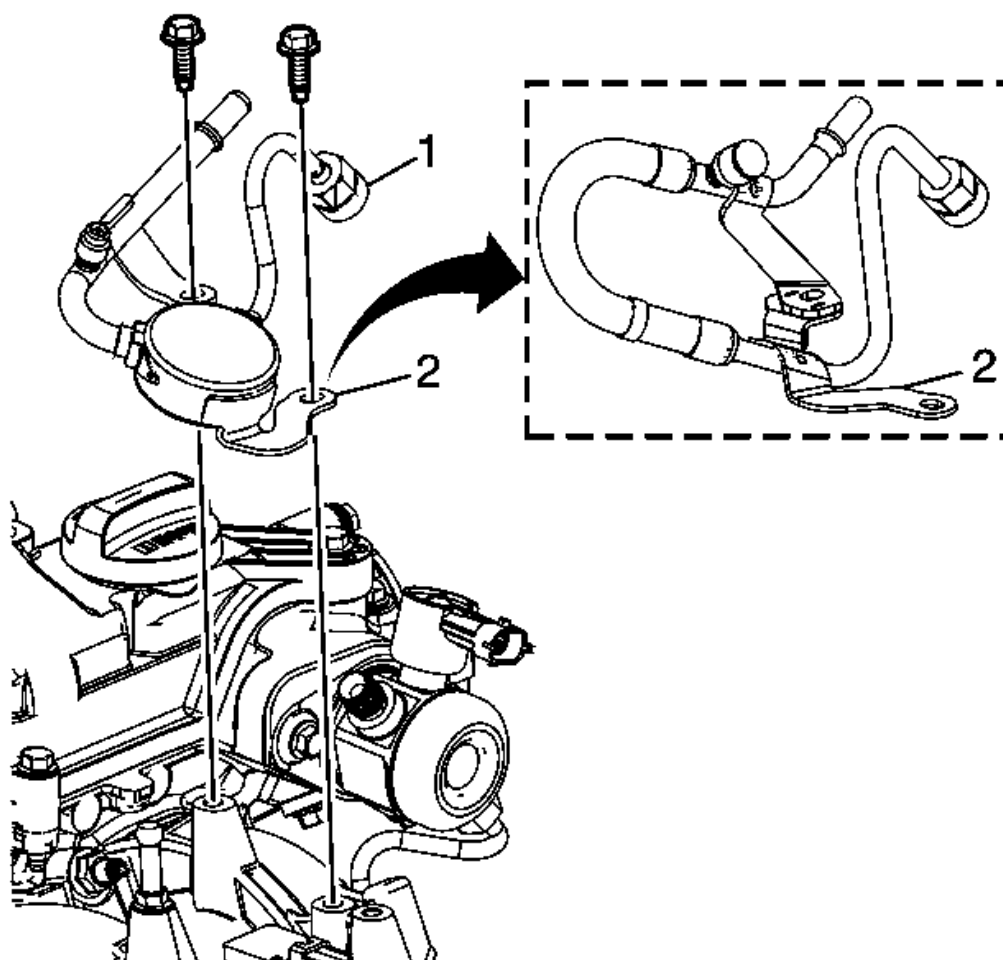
Fuel Feed Line And Fuel Feed Line Tube Nut
